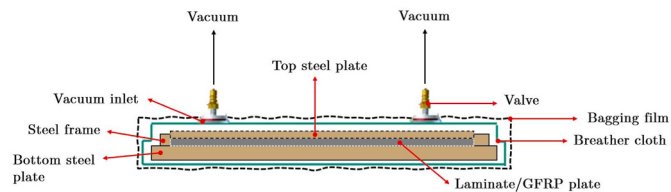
Schematic of the cross-sectional view of the vacuum bagging.
